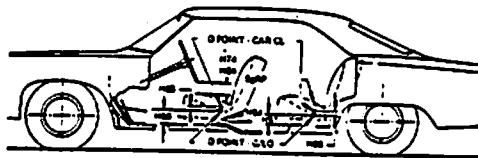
INTERIOR DIMENSIONS, HEIGHT
